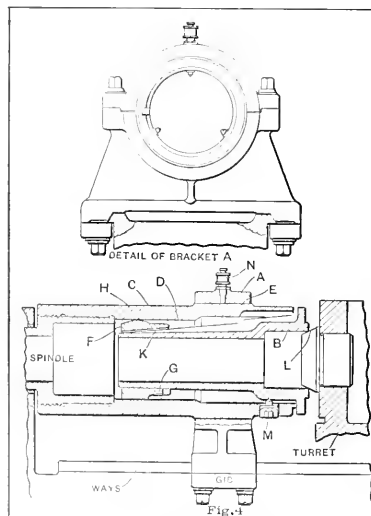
Fixture for holding a Long Part—Outer End is supported by Bracket
